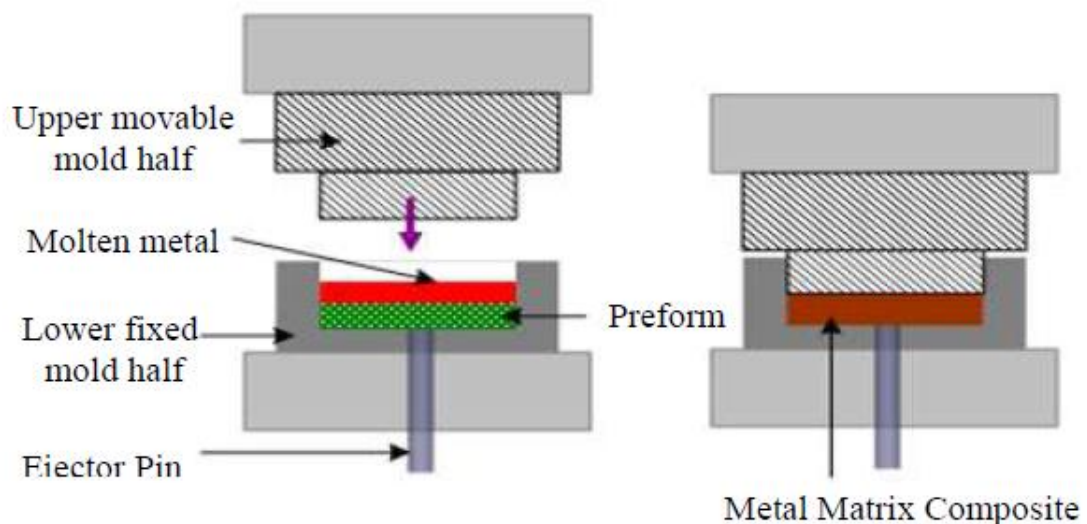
Schematic drawing of Squeeze infiltration Casting after [26].
